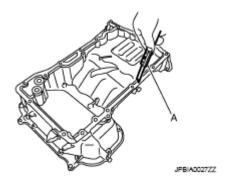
Removing Liquid Gasket From Mating Surfaces Using Scraper Courtesy of NISSAN MOTOR CO., U.S.A.
